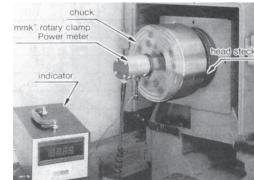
THE MEASURING WAY OF CLAMPING POWER
